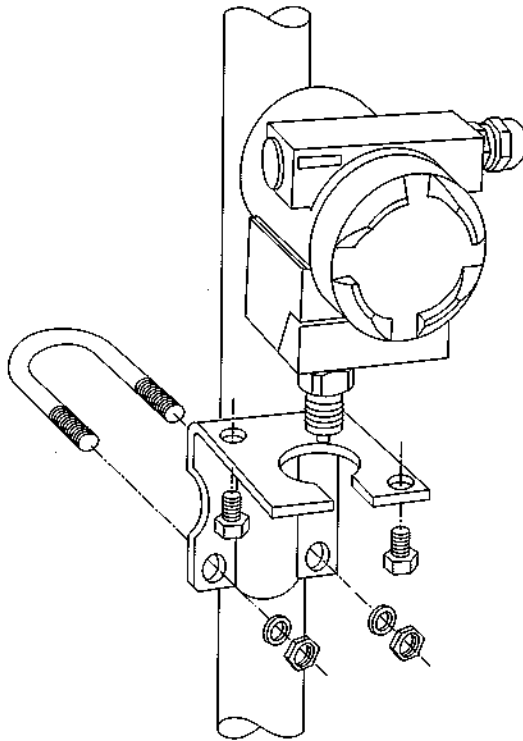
Fixing the SITRANS P transmitter using a mounting bracket
